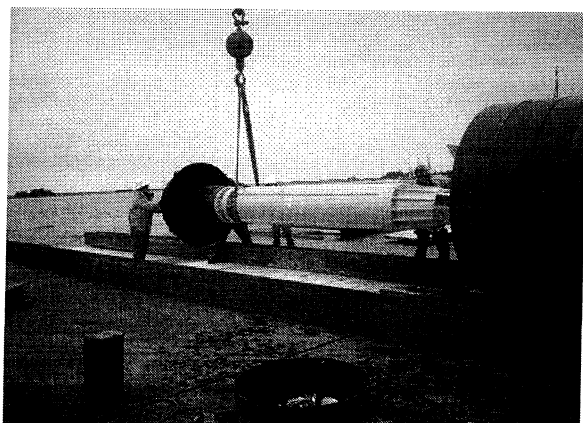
Cylinder/silencer assembly being inserted into masses for lateral testing.
